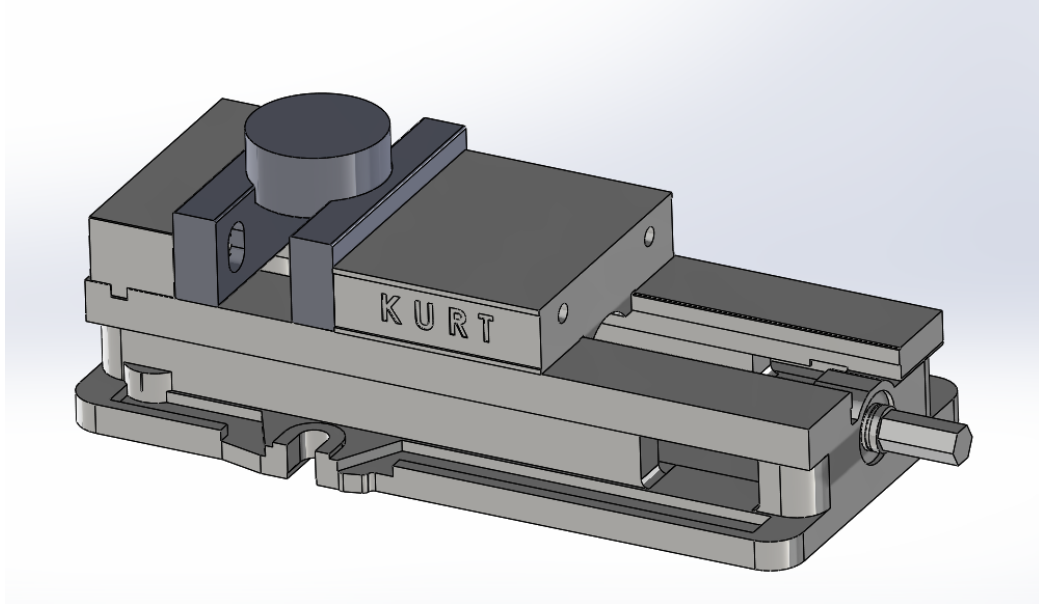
CAD Rendering of Mill Blank Inside Soft Jaws
